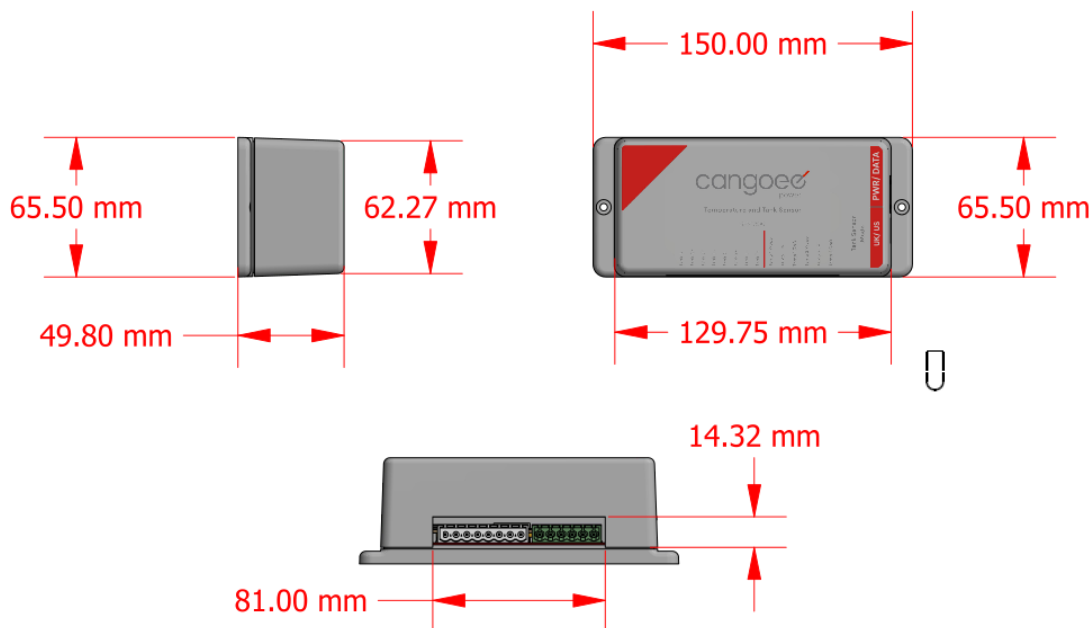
CAN-SEN1000 Tank and Temperature Sensor Module Dimensions
